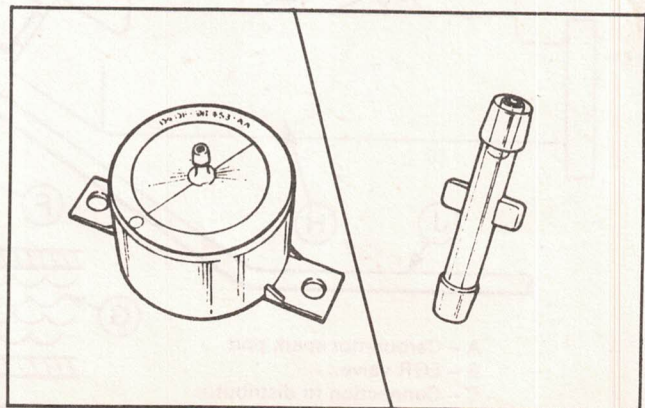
Vacuum reservoir (left hand view) and restrictor (right hand view)
